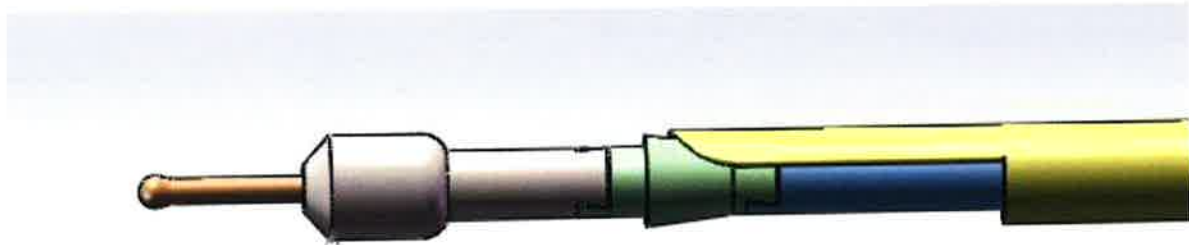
The conical insert design (green) is shown above. In this design, both peek and stainless steel inserts were manufactured as well as follower sleeves (yellow) in both materials.
